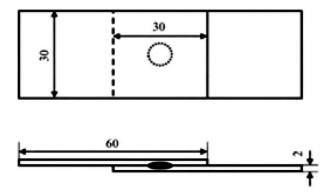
Schematic diagram of the resistance spot welding overlap configuration and tensile test specimen
